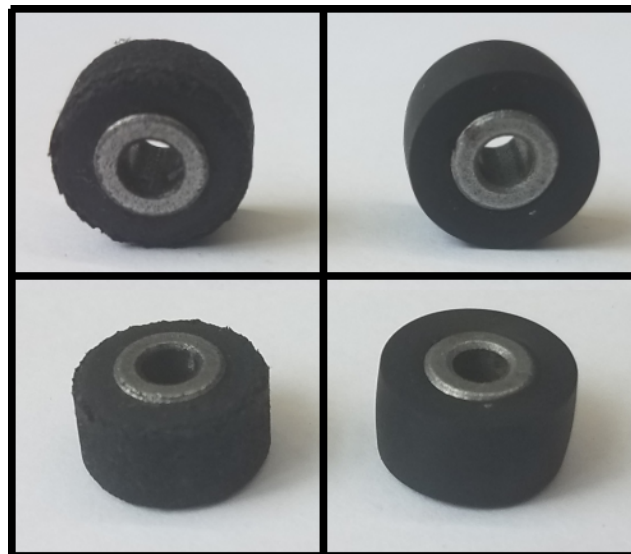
Left*: An old roller after use in the friction wheel; *Right*: A new roller prior to use in the friction wheel.
